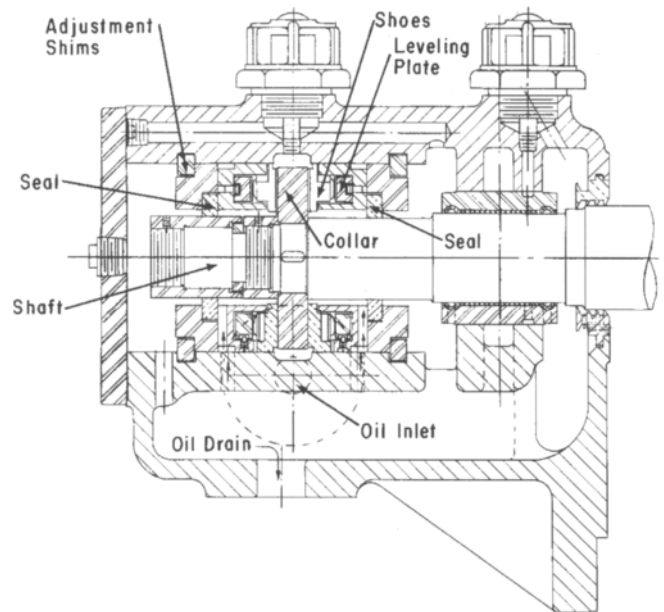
B. Kingsbury-type thrust bearing for centrifugal compressor. (Used by permission: Kingsbury Machine Works, Inc.)
